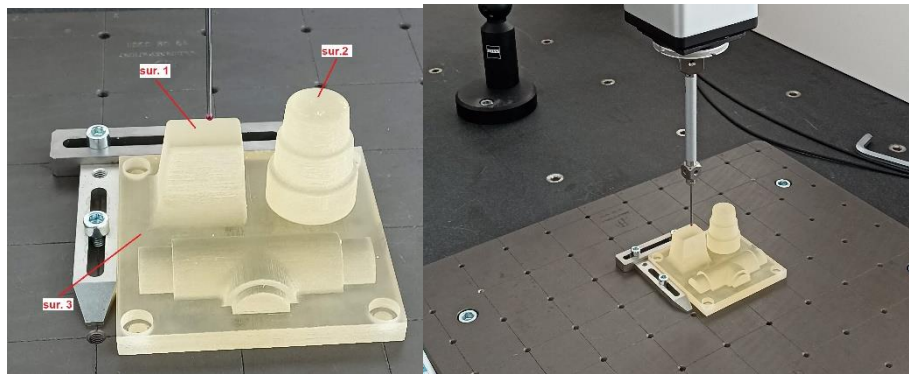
Flatness measurement of casting patterns produced by PJM technology.
